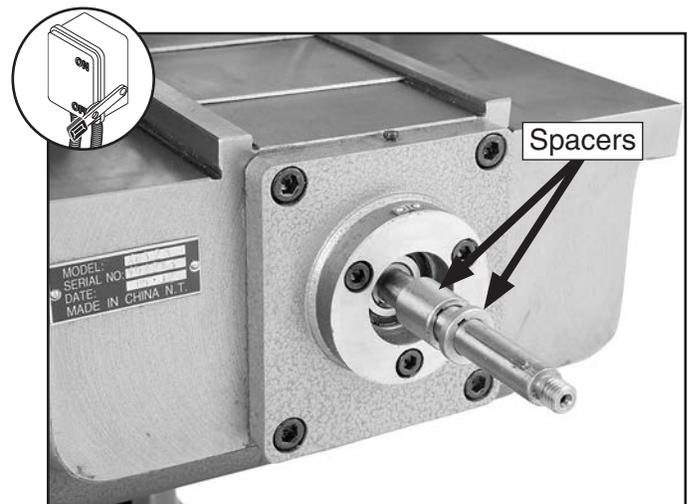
Ball handle and graduated dial removed from Y-axis lead screw.
